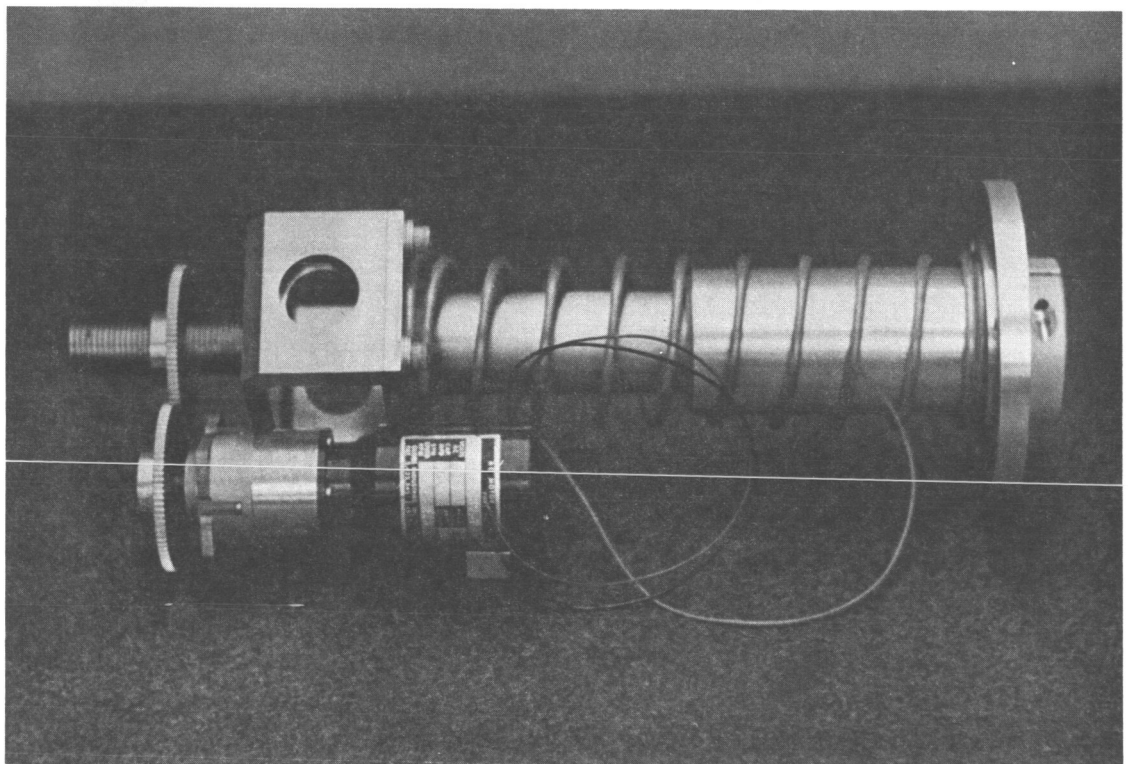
Focussing unit showing focussing motor, focussing gears and screw, and focussing spring
